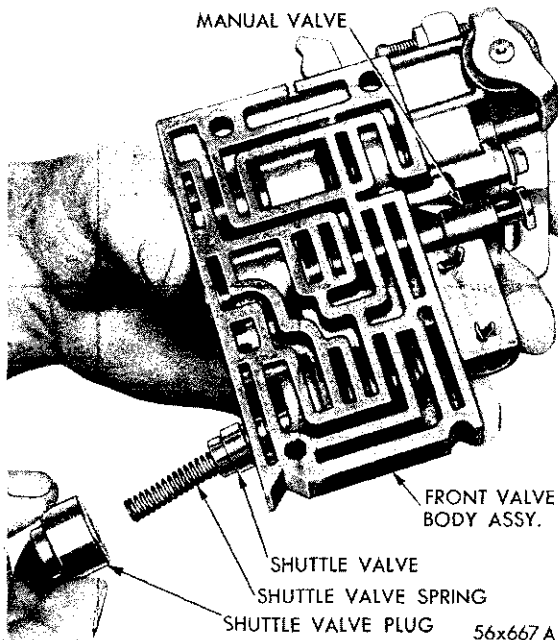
Removal and Installation of Shuttle Valve, Plug, Spring and Valve
